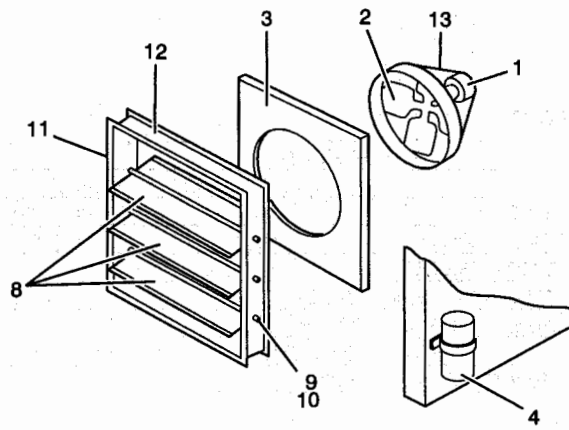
POWER EXHAUST SECTION - EXHAUST DAMPER ASS'Y (ITEM 7)
